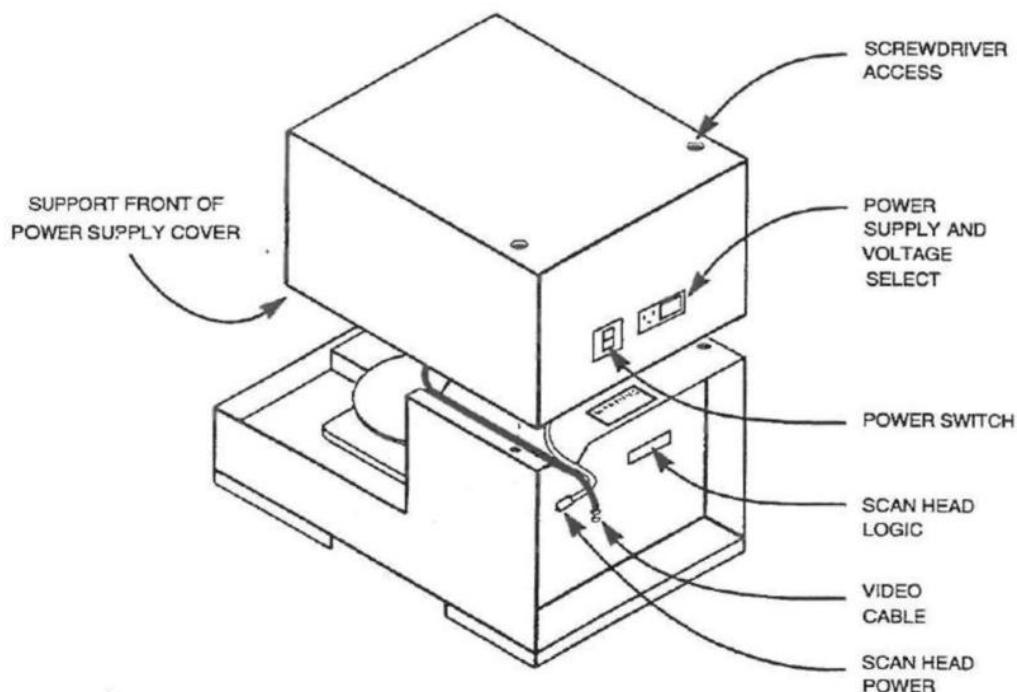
4 Power Supply Cover/Scan Head Assembly
